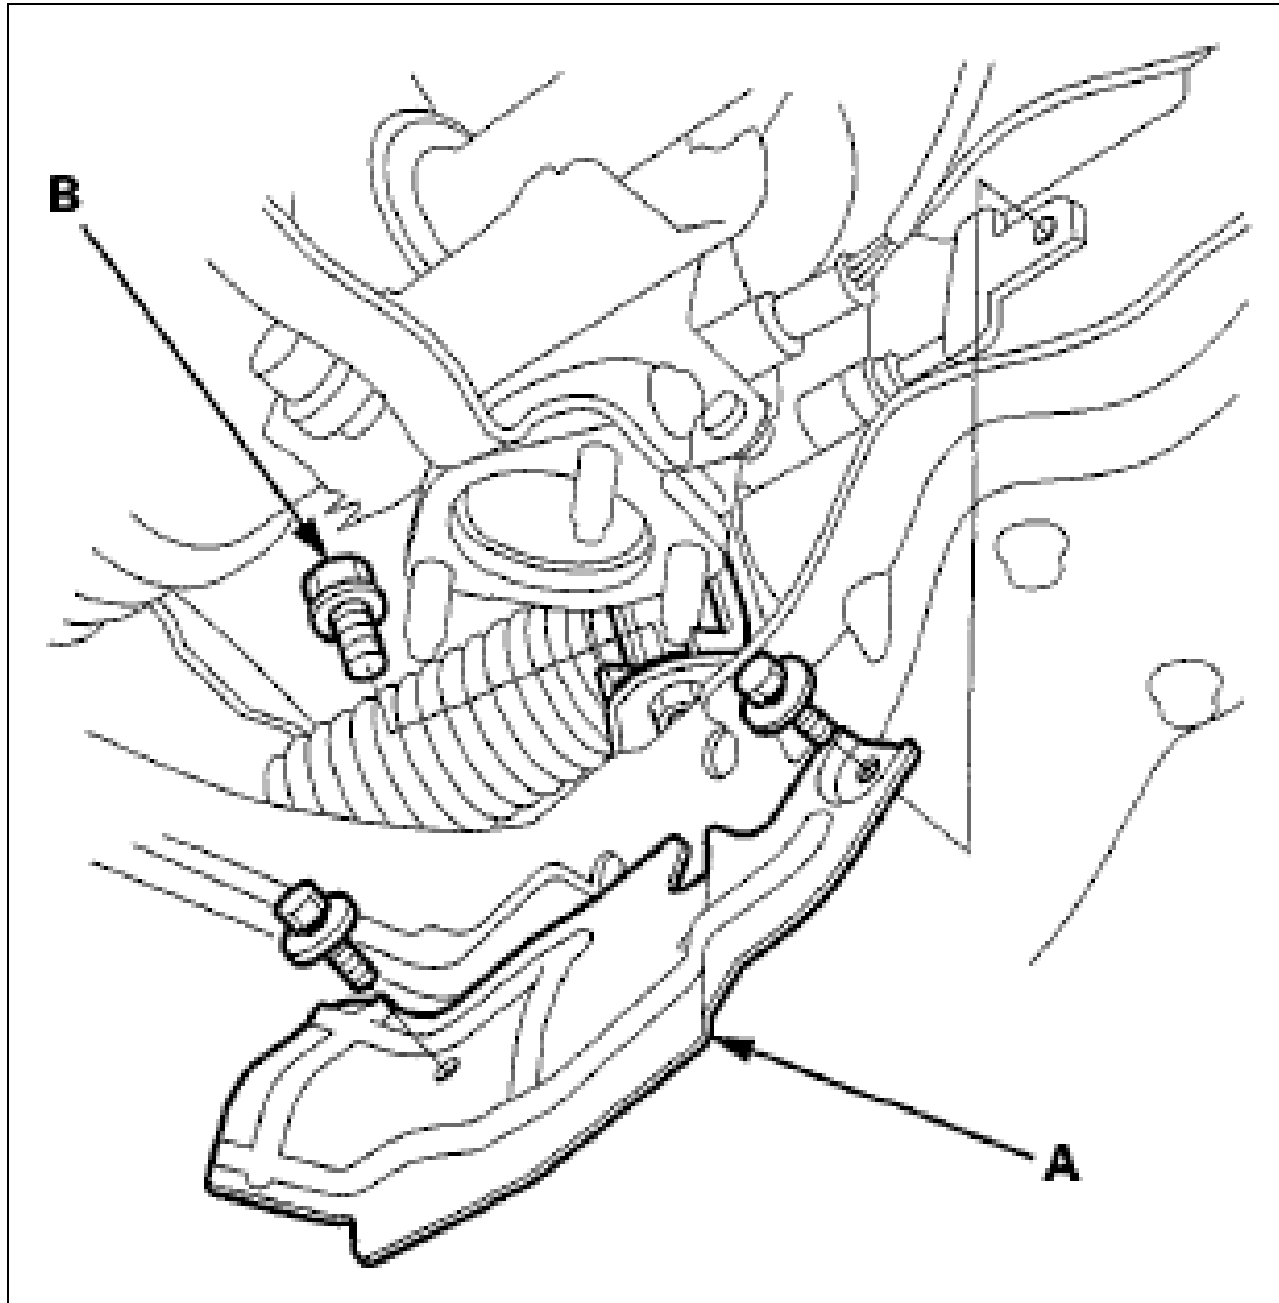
Identifying Steering Gearbox Mounting Bolt And Steering Gearbox Stiffener
